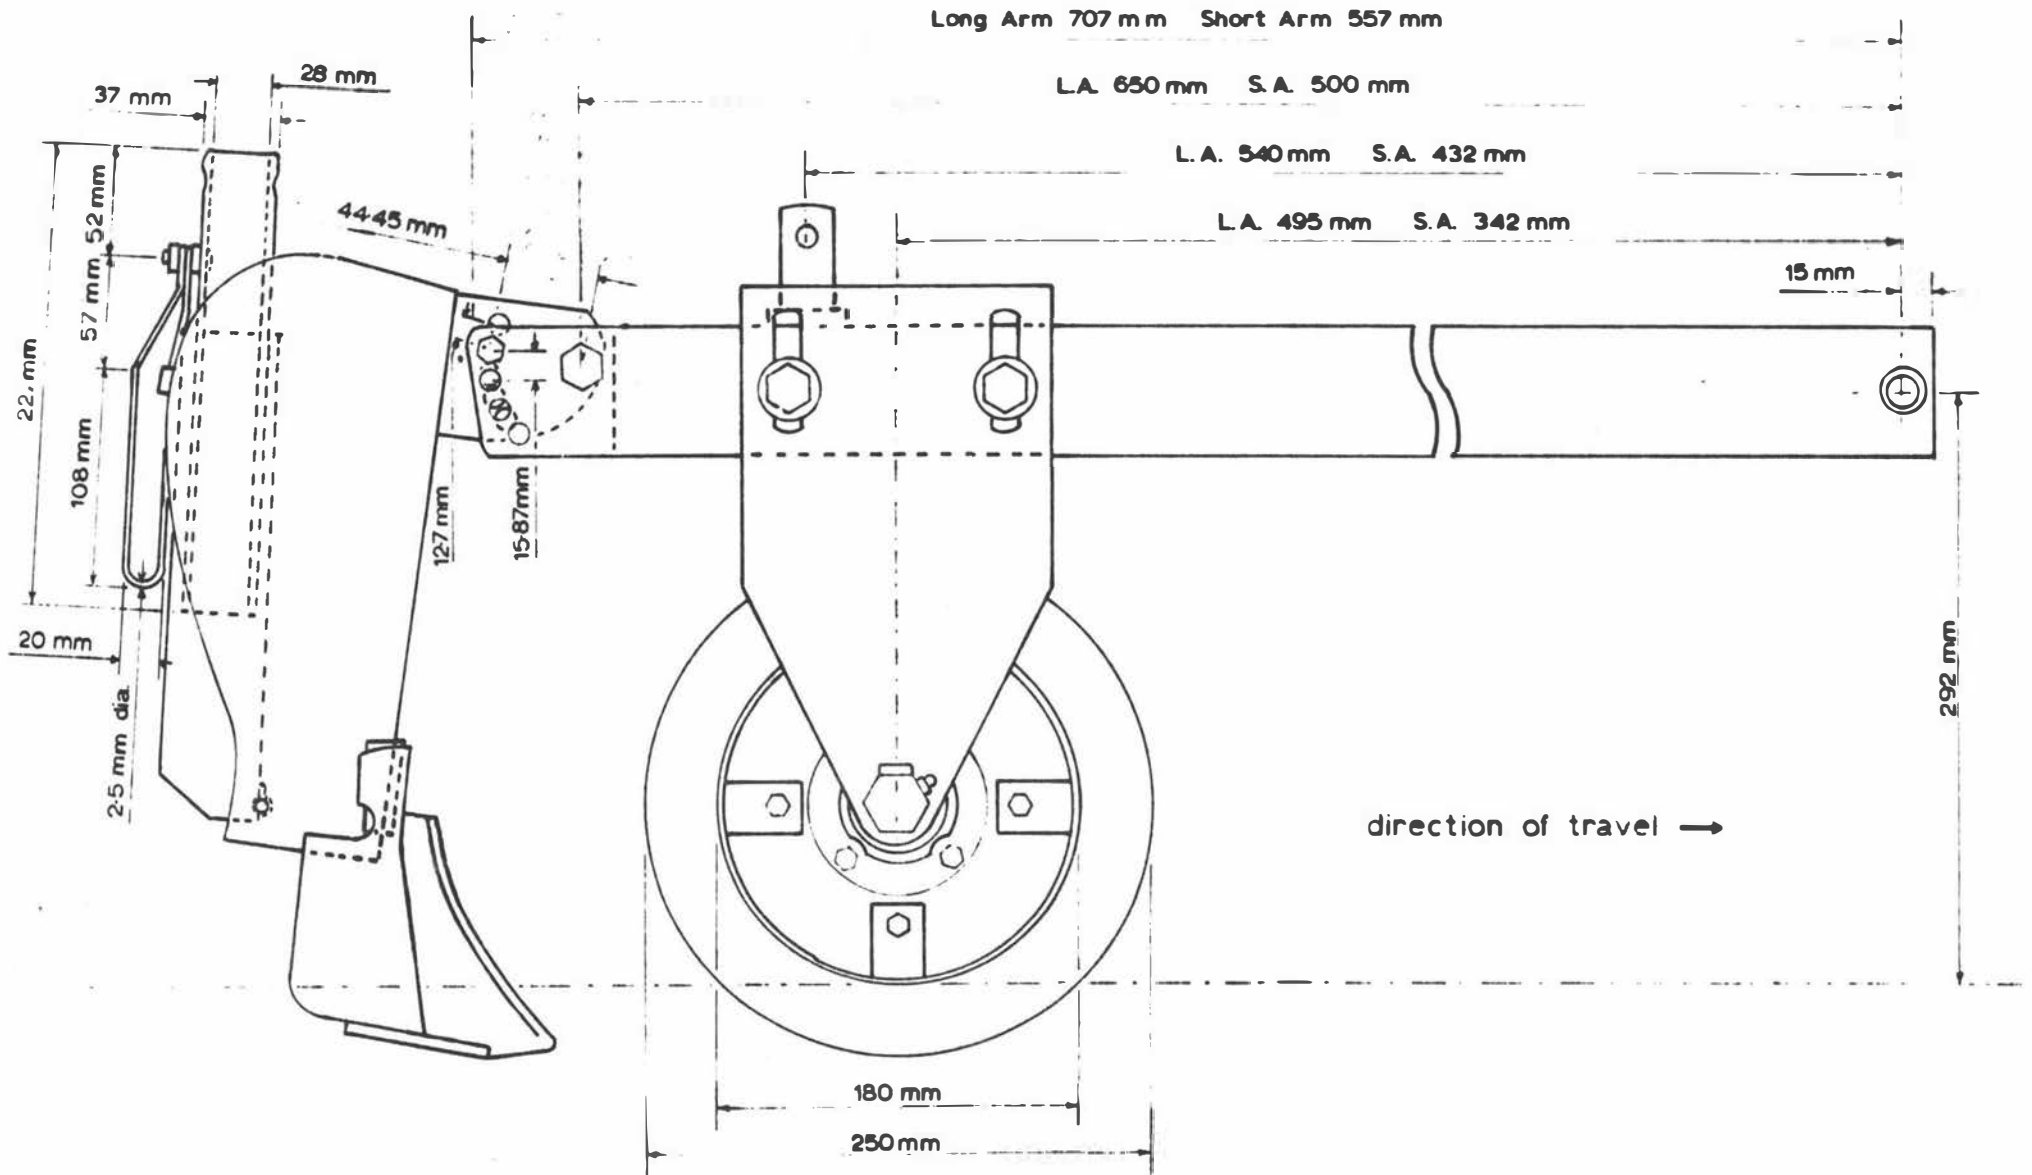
(d) Mk. 2 chisel coulter assembly and drag arm
